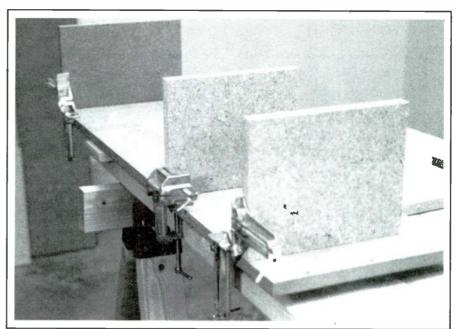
Aligning horizontal baffles using 90° angle clamps.
